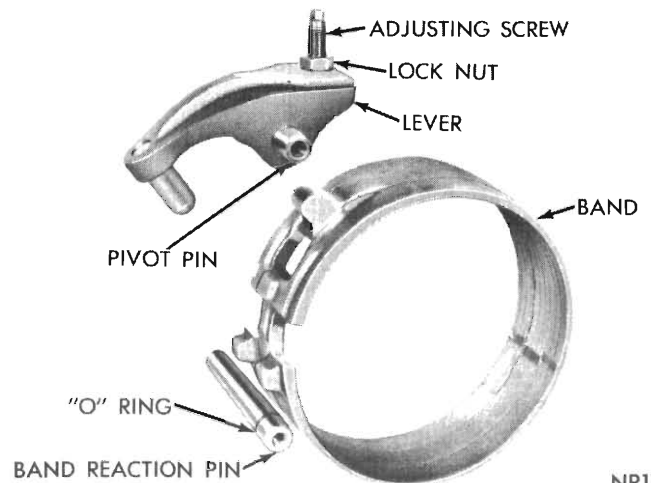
Double wrap band and linkage — disassembled (A-904-LA transmission only)
